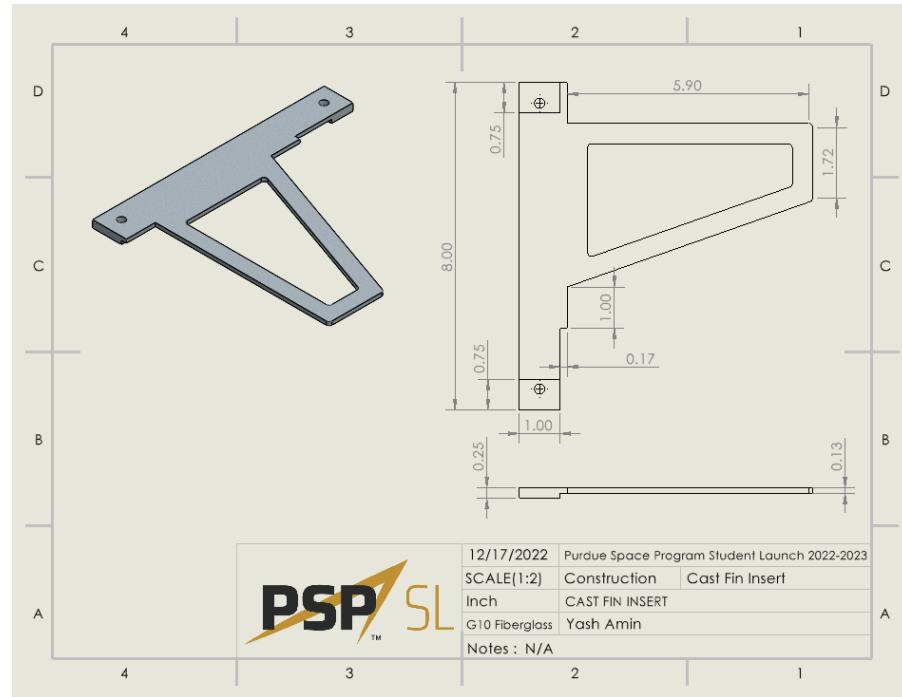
Technical Drawing for Fin Insert
